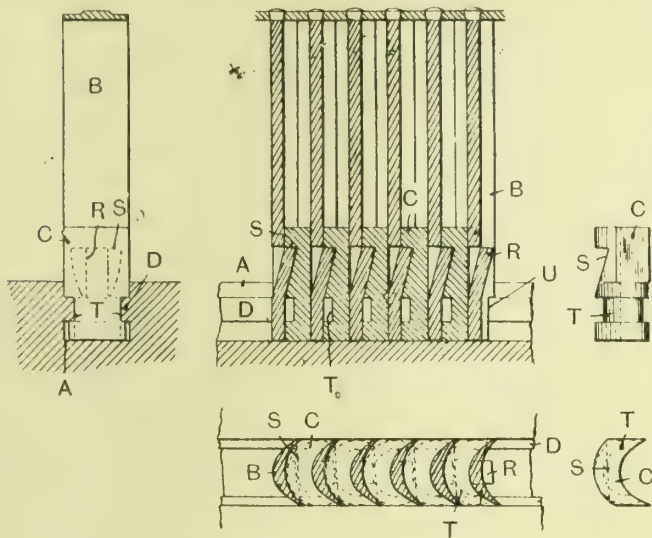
METHOD OF SECURING VANES AND BLADES IN STEAM TURBINES.
